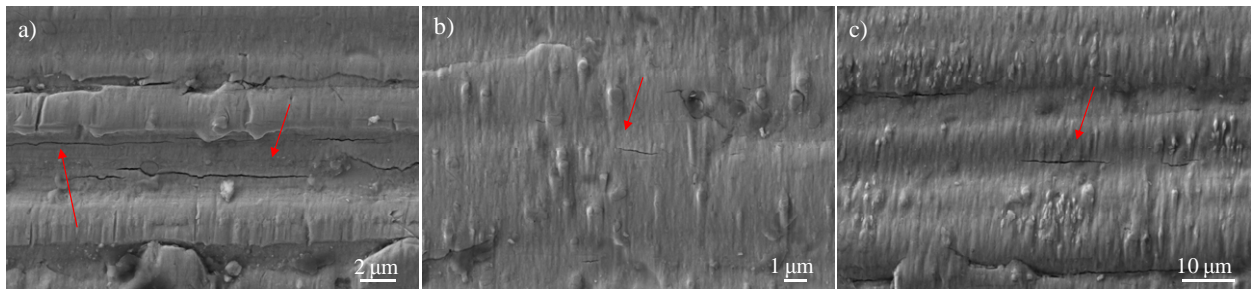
Microcracks at the flank face of the lower HWS tool at 10000 strokes
